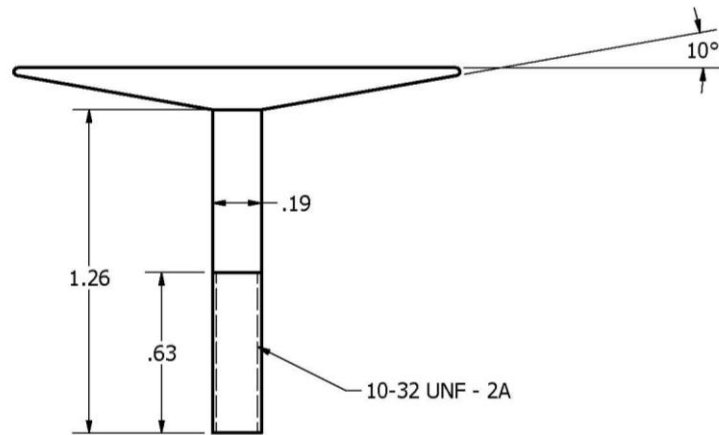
of Spindle Used to Modify the Original Air Injection Probe.
